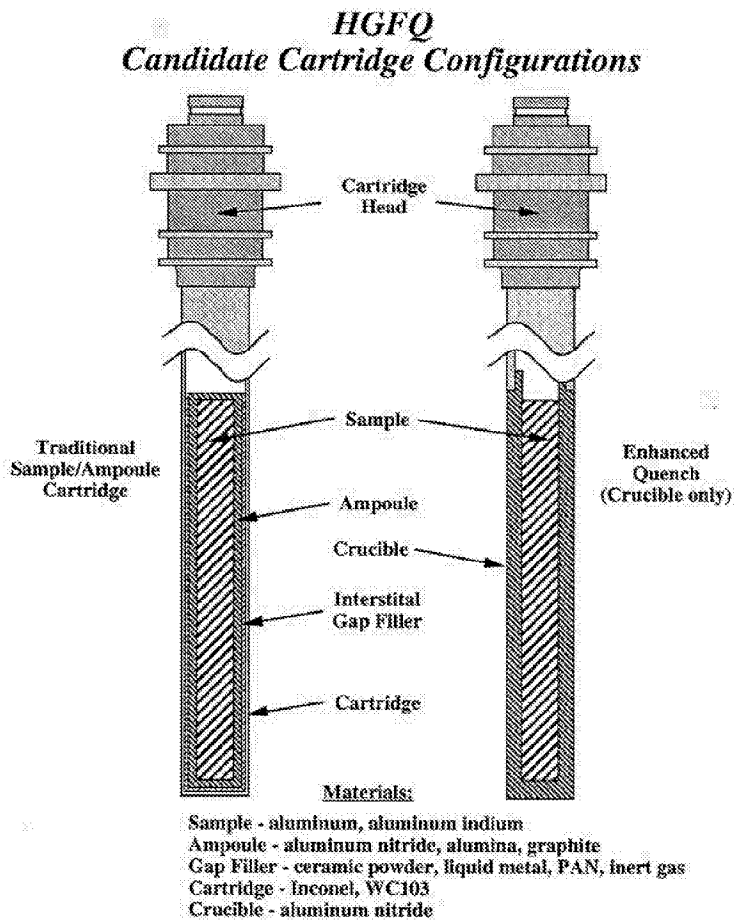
Two different Sample Container Assembly (SCA) Designs.
